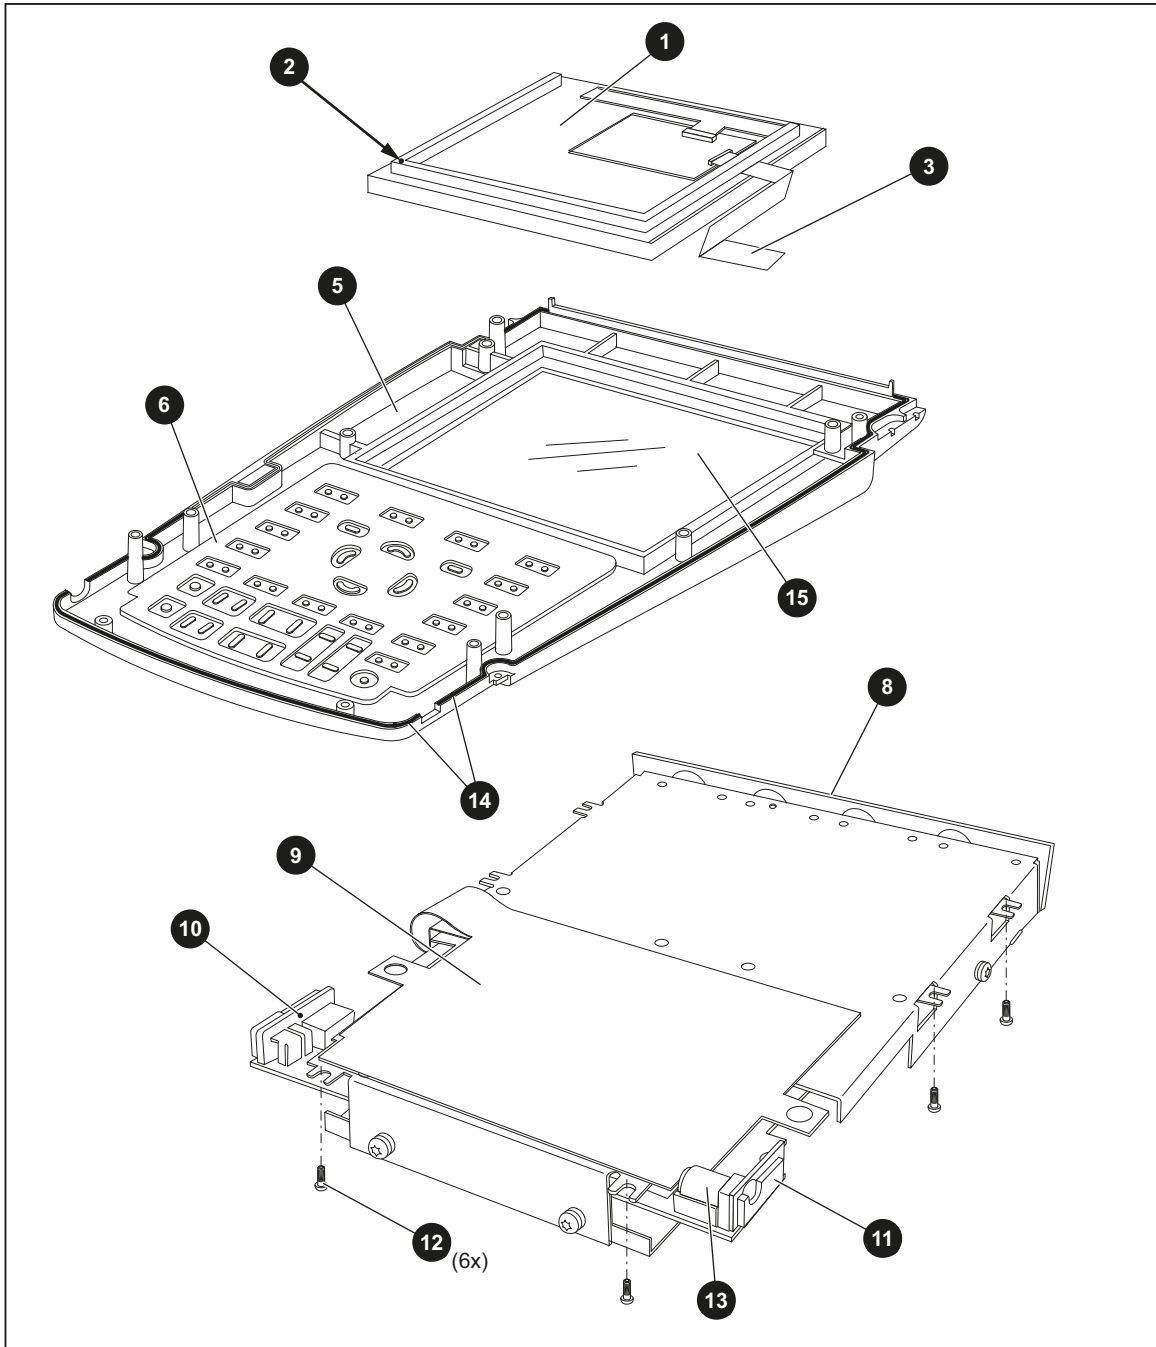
PCA Removed from Chassis, Bottom Side Visible
